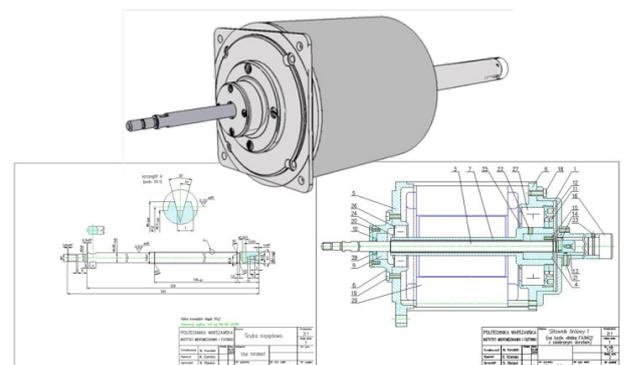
Three dimensional models of parts and assemblies are used to create technical drawings
